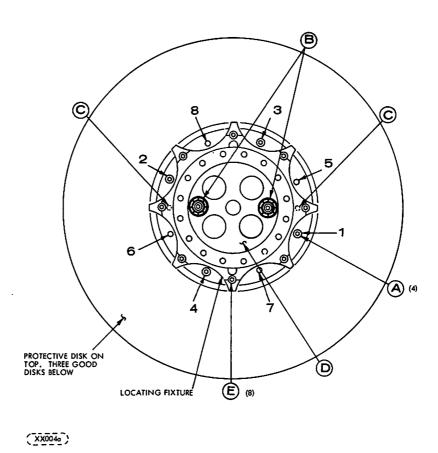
FIXED DISK PACK LOCATING FIXTURE AND PROTECTIVE DISK
